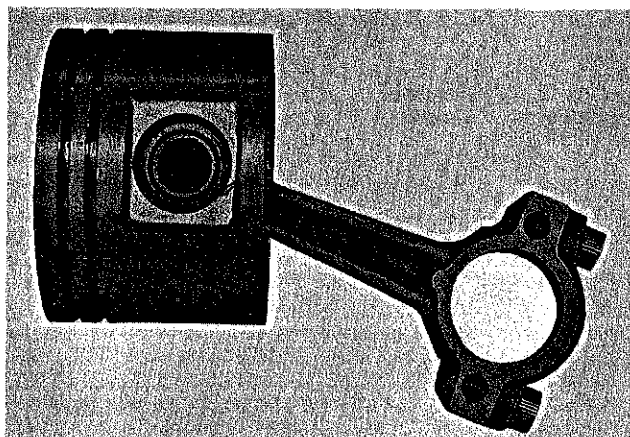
A correctly installed piston pin. The end of the pin and the bearing are flush.
